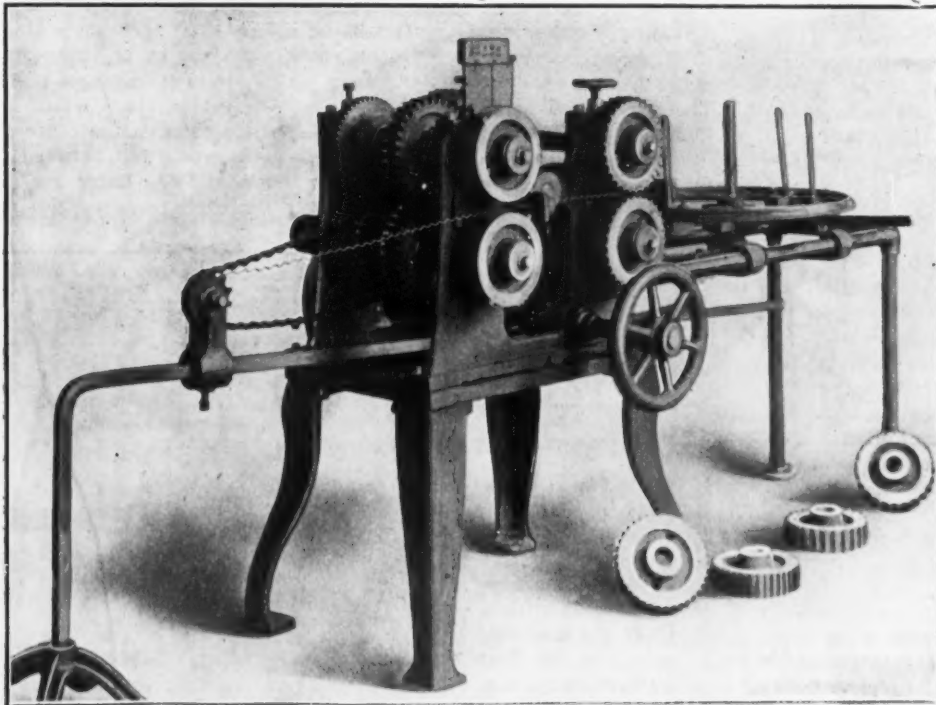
The Automatic Machine for Crimping Wire Made by Smurr & Kamen, Chicago.
